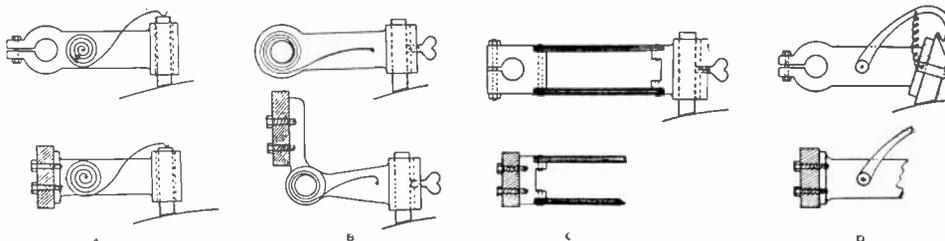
The sketches on the left show several common types of brush holders. At "A" are two views of box-type holders. "B" and "C" are known as clamp-type holders; while "D" is a brush holder of the reaction-type.
